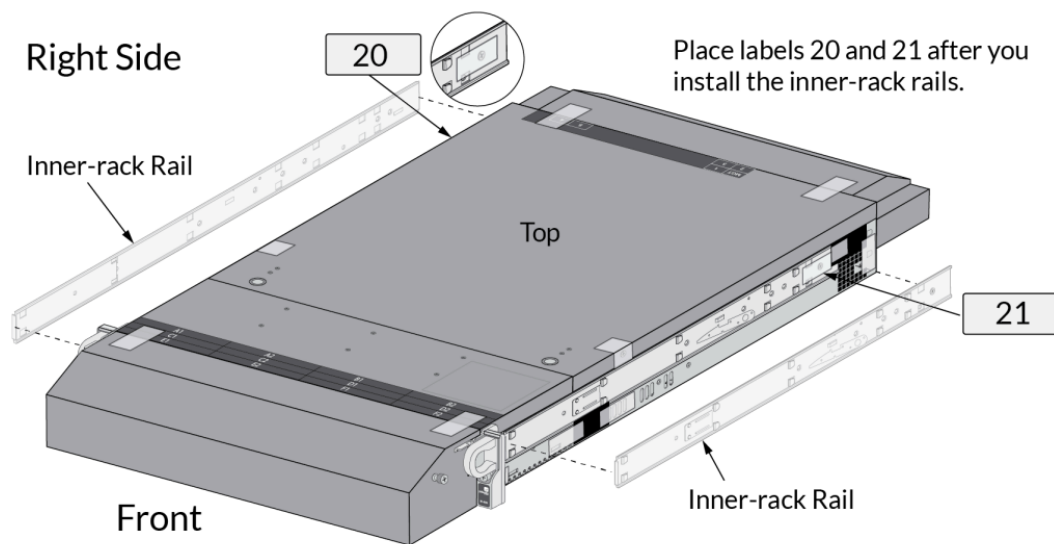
WF-500-B: Tamper Seal Locations Top for Side Rails
